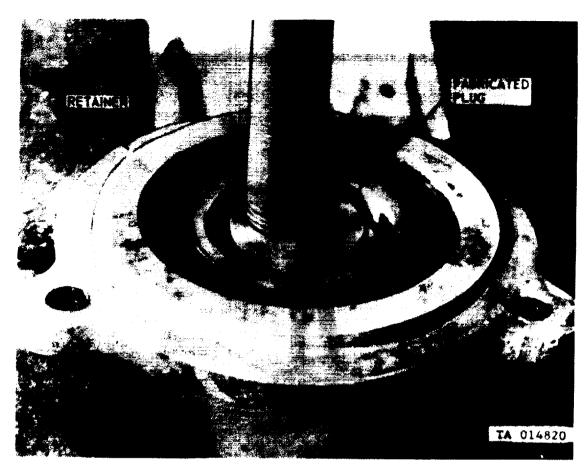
Retainer with bearing mounted in press-bed blocks for removal of obsolete bearings, using fabricated plug (inverted for this step).
